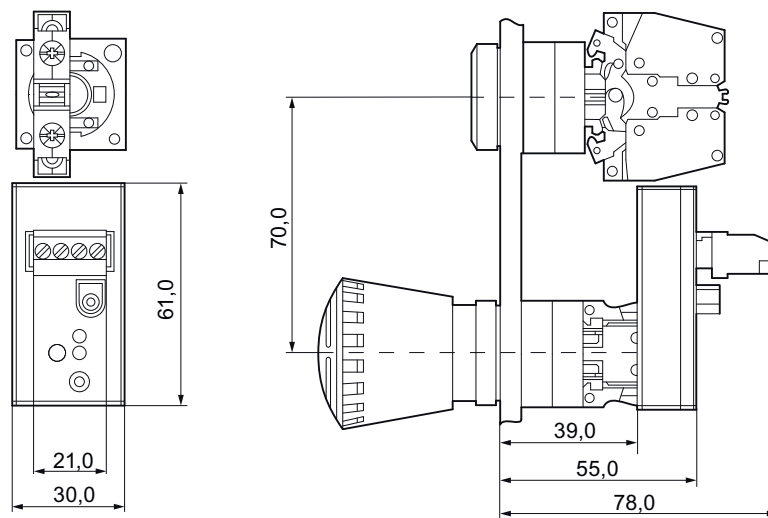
3SF5402-1AA03, 3SF5402-1AB03
